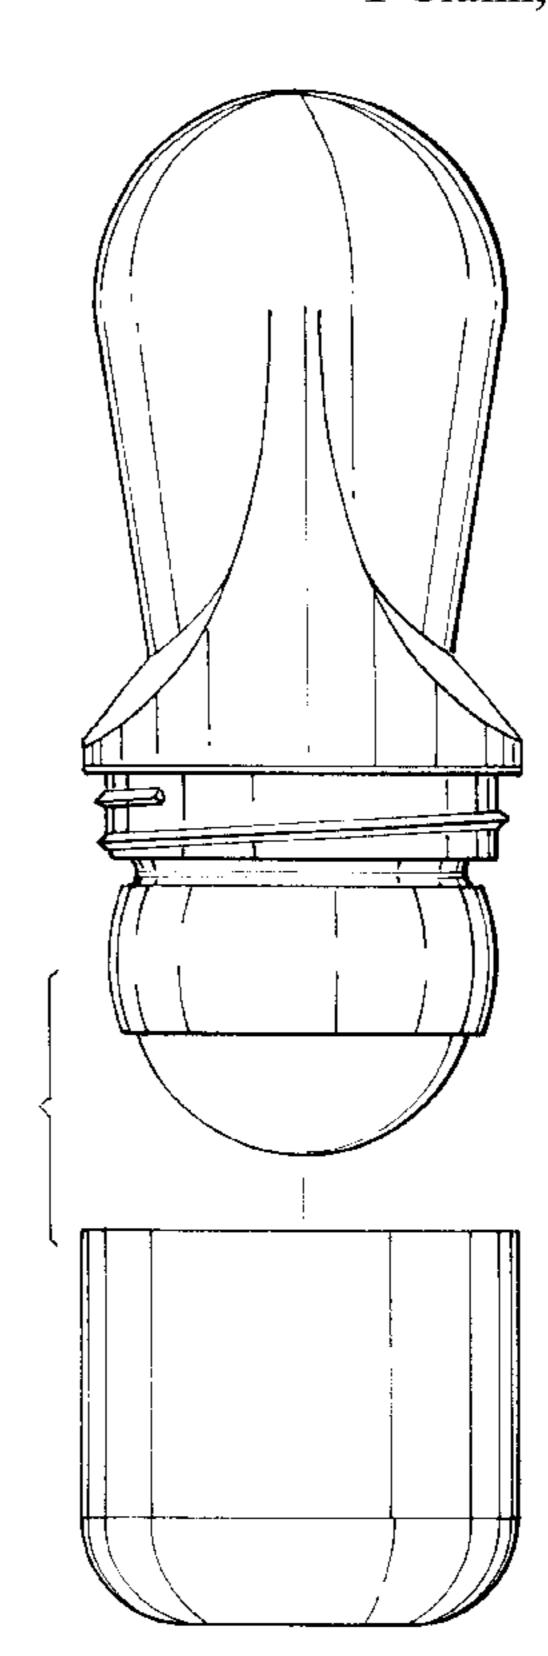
is a similar view to that of FIG. 4, but illustrating the container-lid assembly turned by 90 degrees;
